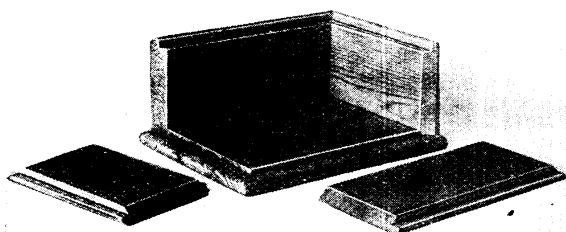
Before permanently assembling the parts, the whole construction should be put together loosely as a test of truth
